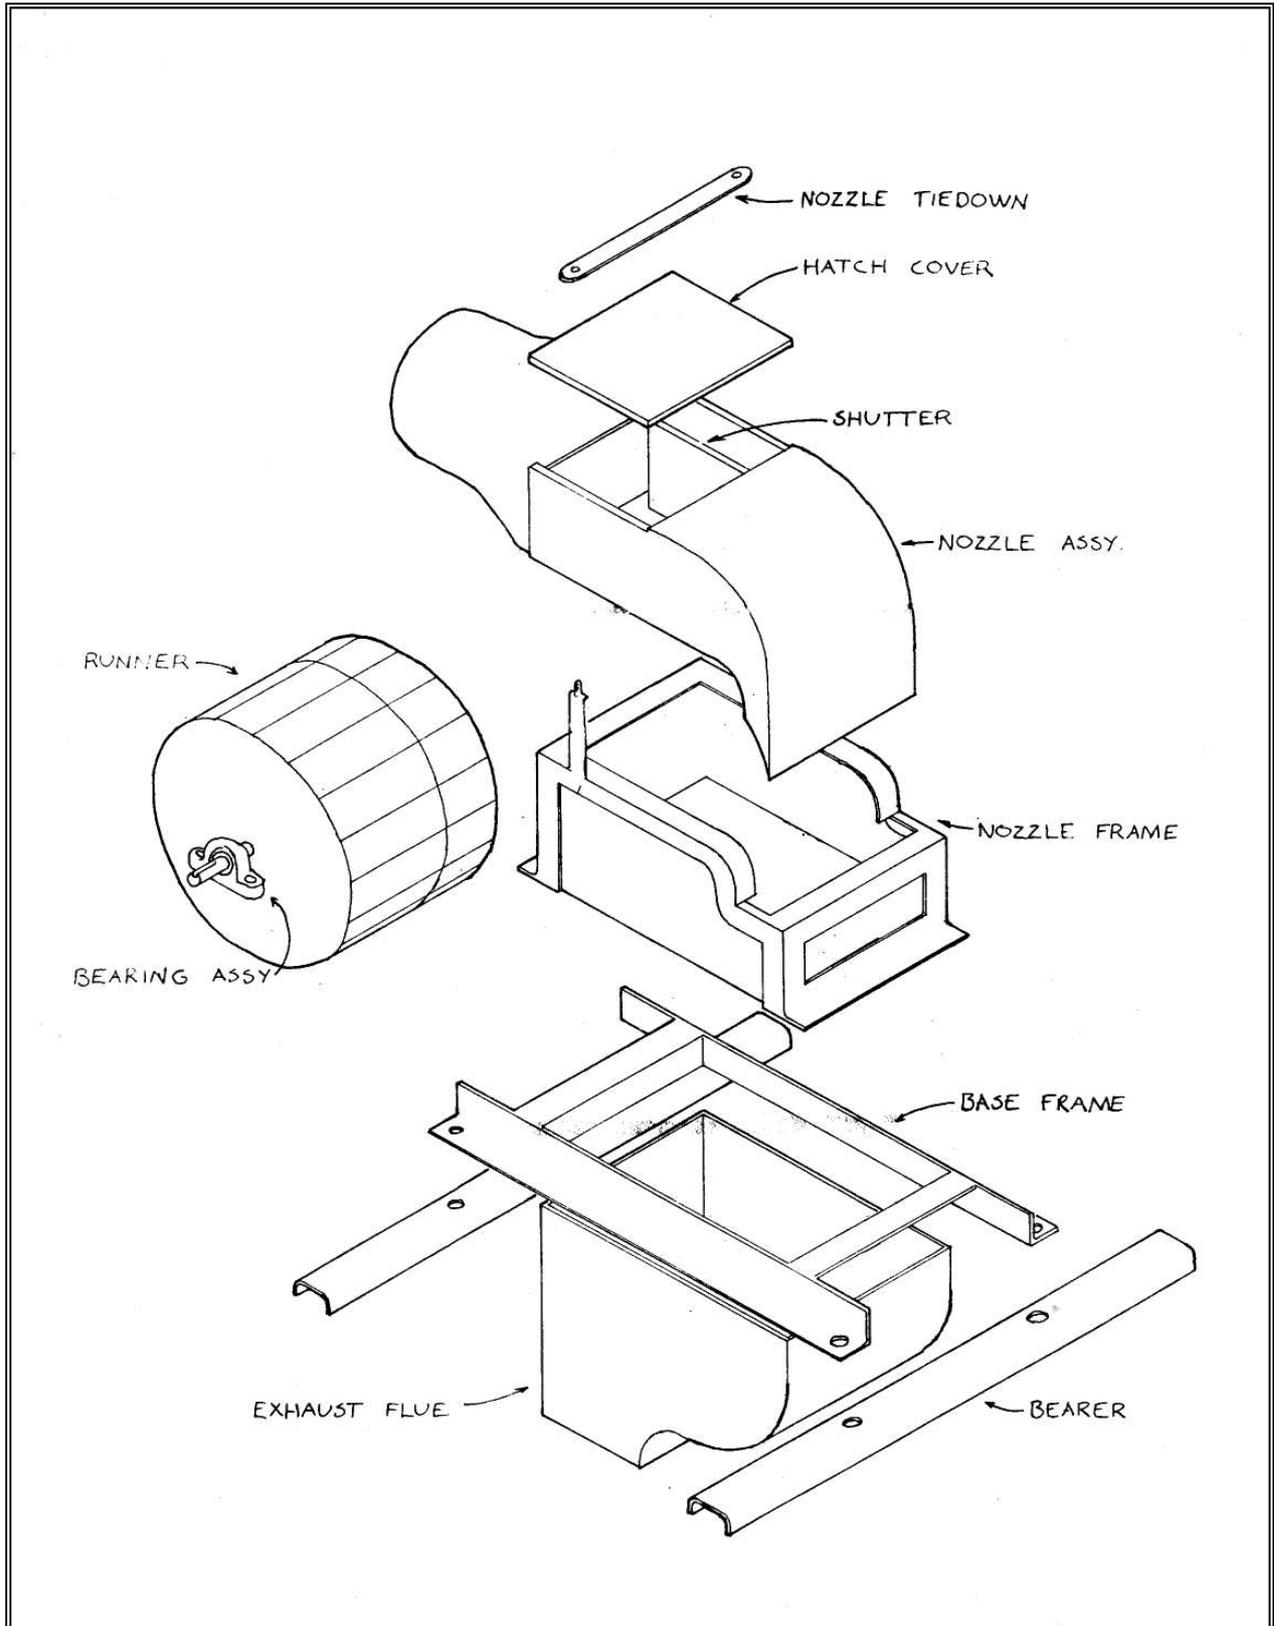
drawing showing frame, housing, nozzle assembly & runner
